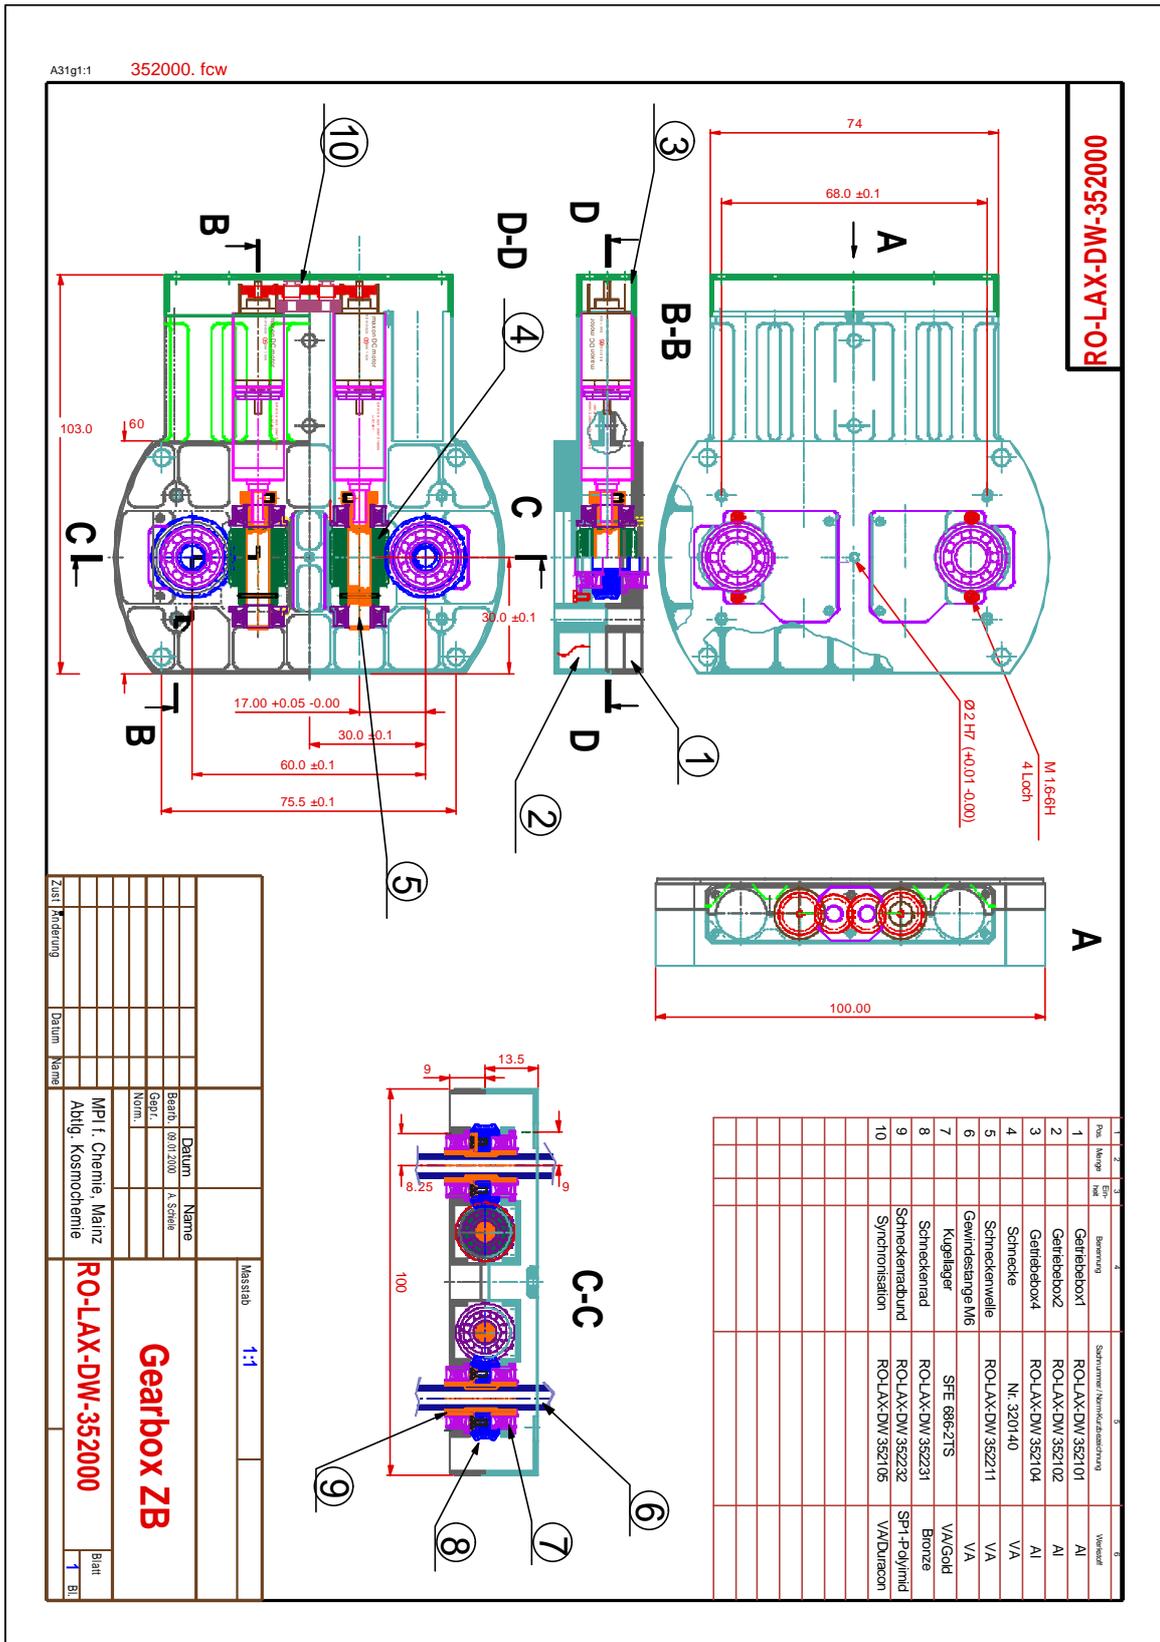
RO-LAX-DW-352000 APXS Gearbox
